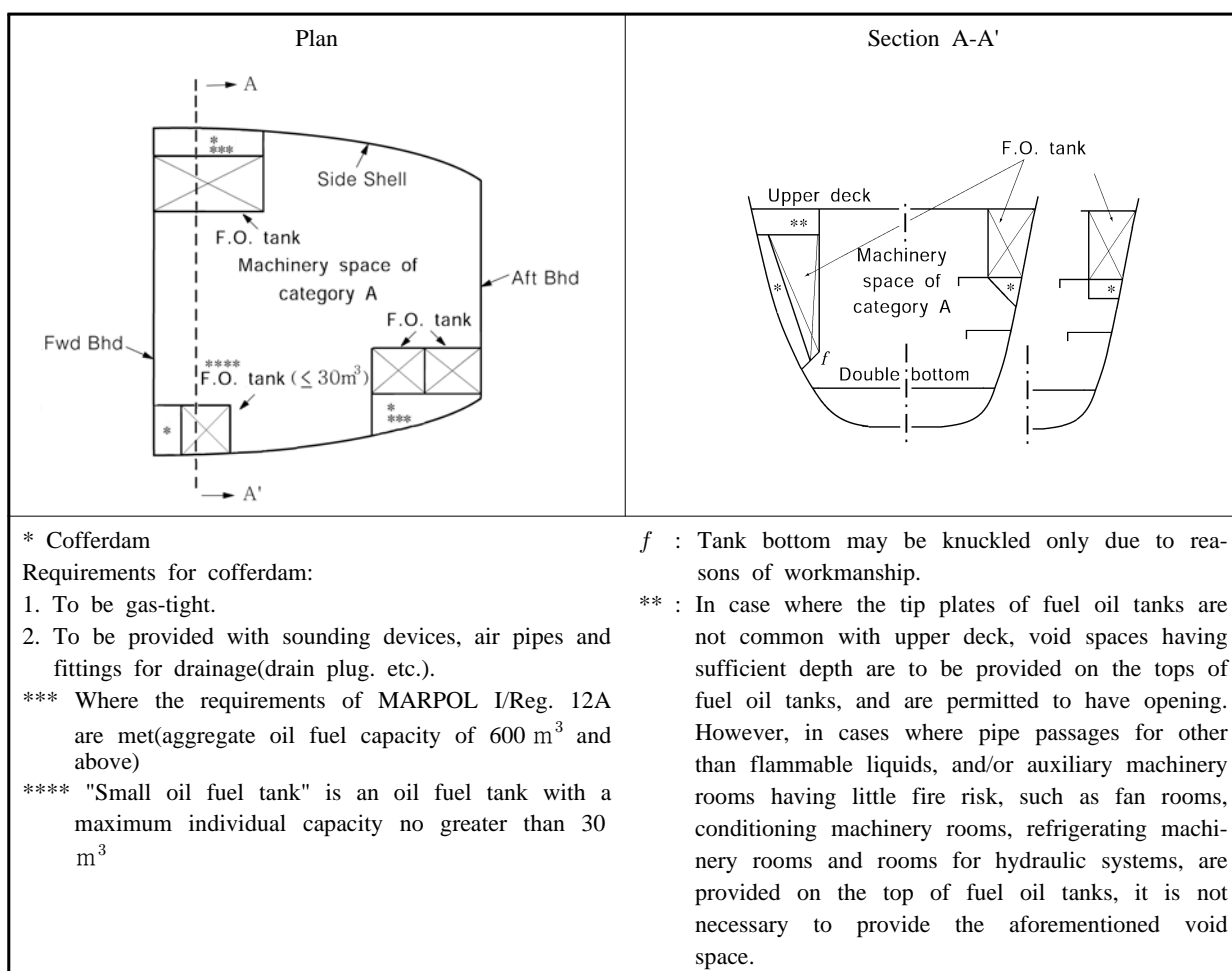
Standard arrangement of fuel oil tanks in machinery spaces of category A
